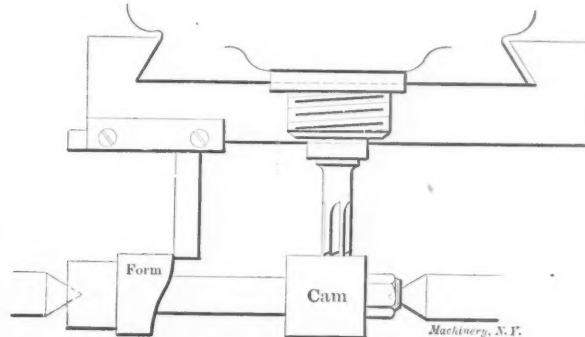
The Machine as Fitted Up for Cutting Cam.
